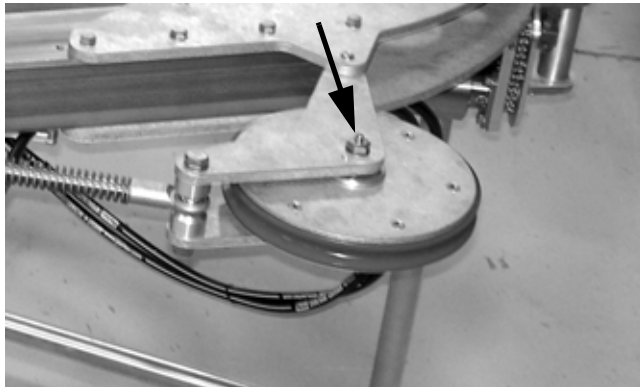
Remove the hub bolt to take off the wheel. The bolt head is on top in this view, with the nut on the bottom of the fixture.
